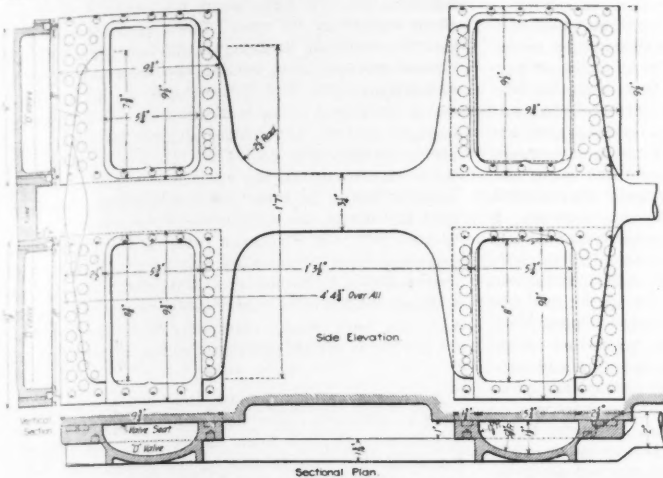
DETAILS OF COMPLETED SLIDE VALVE.
